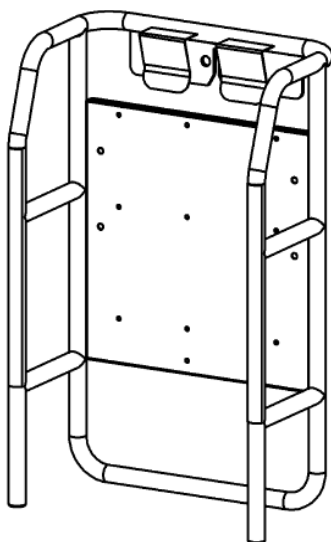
Rockstarter Mounting Frame C/W Bolts – PN: 177190
